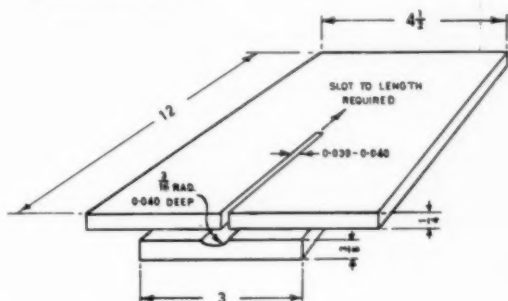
Slotted butt-weld cracking test specimen (metal arc electrodes).
